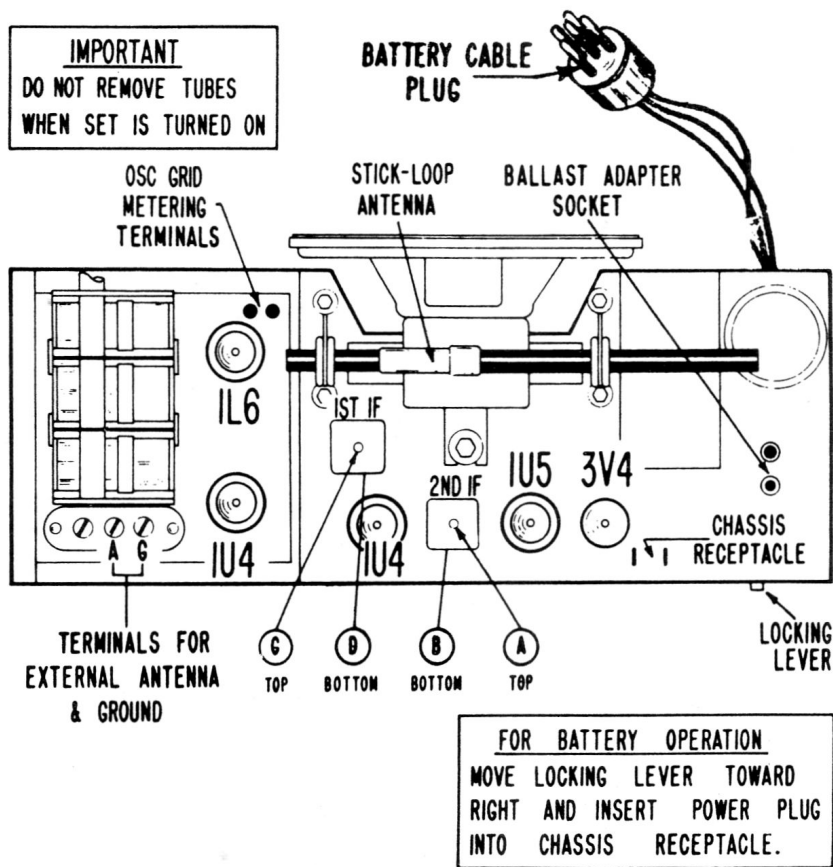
Top View of Chassis Showing Location of Alignment Adjustments and Tubes
